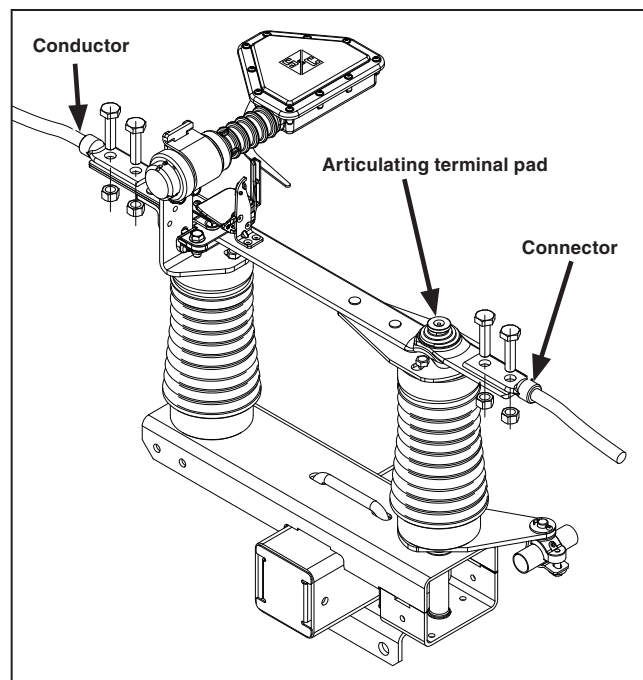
Attach conductors to terminal pads. Do not overload the terminal pads. (Typical conductor attachment.)
